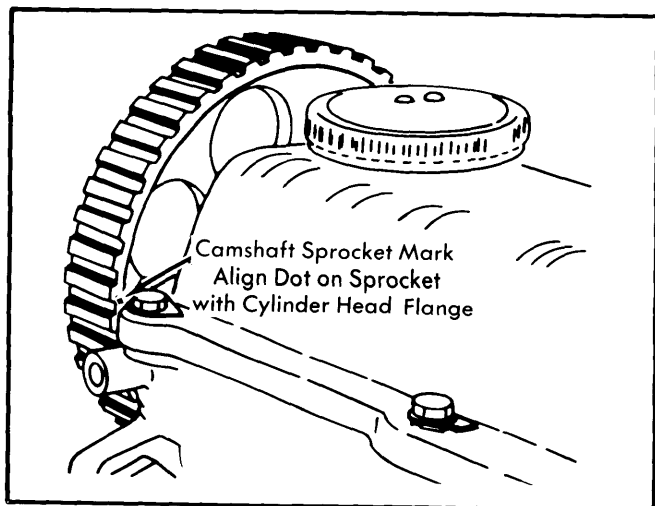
Index Mark on Camshaft Sprocket Aligned with Cylinder Head Flange
